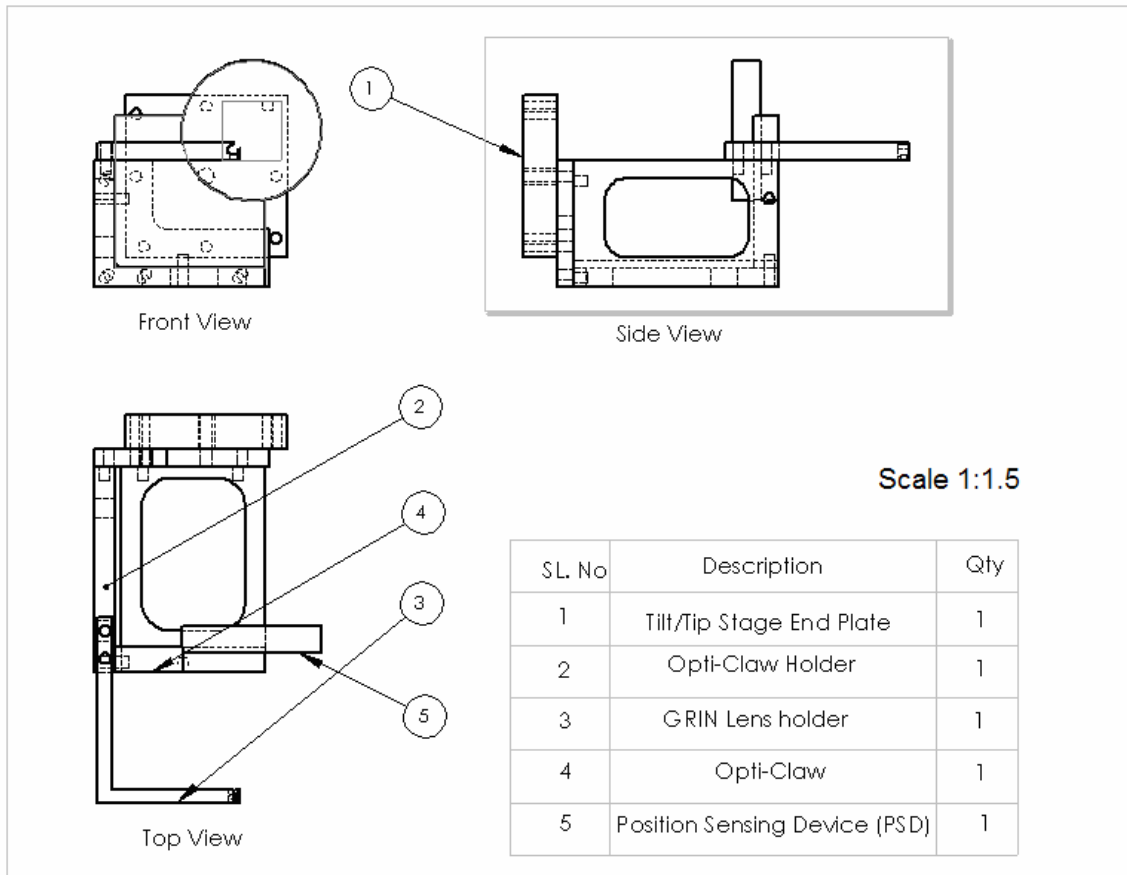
Assembly for Holding the GRIN Lens and the PSD
